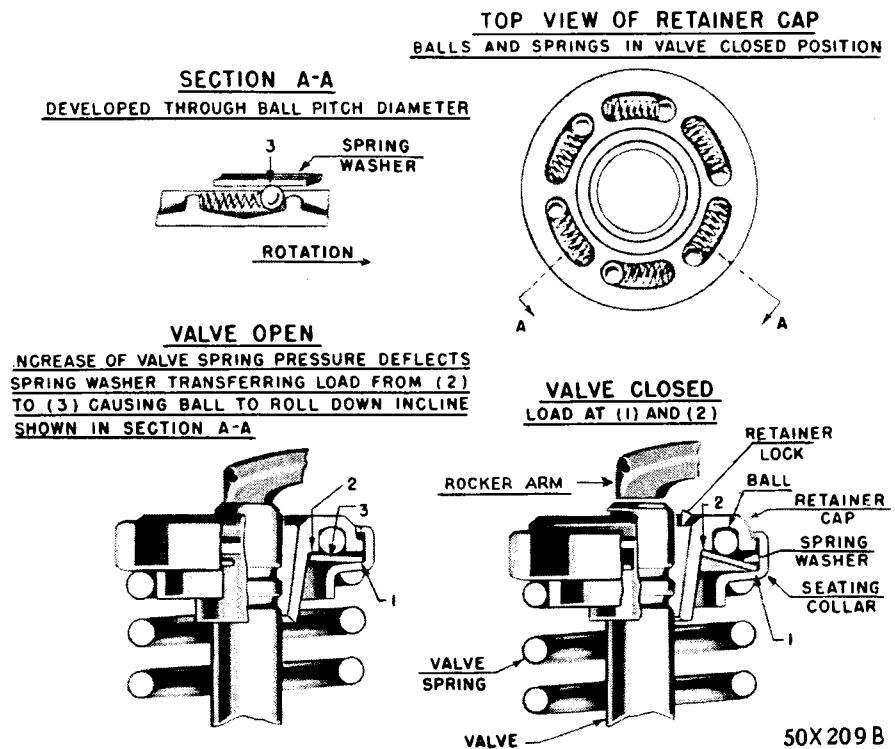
Exhaust Valve Spring Retainer Assembly Rotators (Schematic View)
